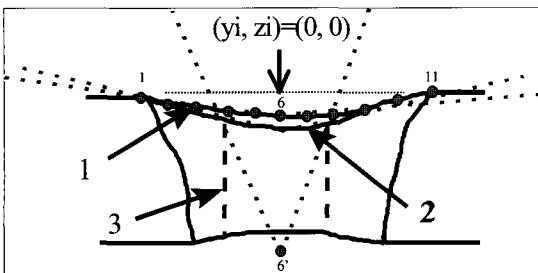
Laser welded bead after postprocessing having an information of angle and depth
